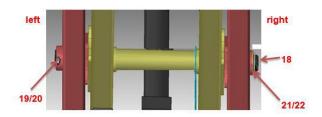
Installation of fifth layer fork 18. Pin 19. Bolt 20. Nut 21. Washer 22.
